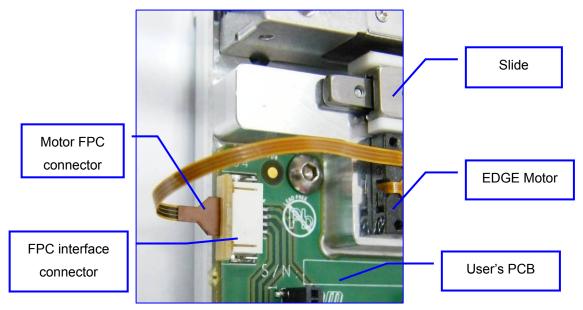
Connecting the Motor FPC to the FPC Electrical Interface (example of design used for EDGE MOTOR EVALUATION KIT)
